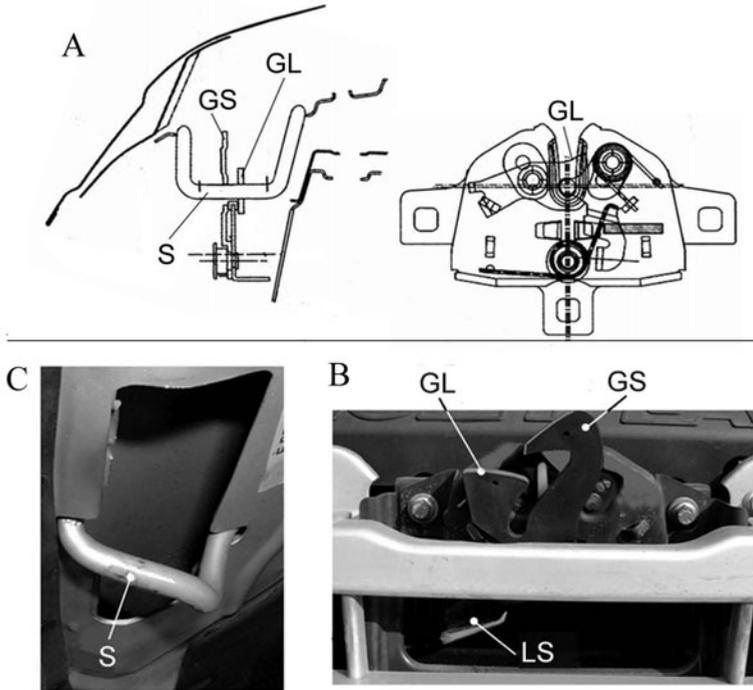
Examples of hood latches, fitted to front radiator cross member. A: with split work (GL) and safety (GS) forks; B and C: one only fork for both functions; S: striker, welded to hood frame; LS: safety lever.
